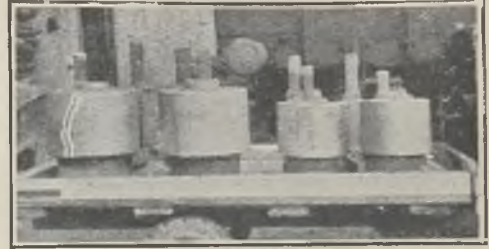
SMALL BRAKE CHILL CASTINGS.
